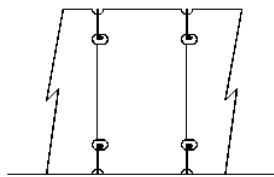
Block assembly methods 4-2c and 4-2d [2], [30]
